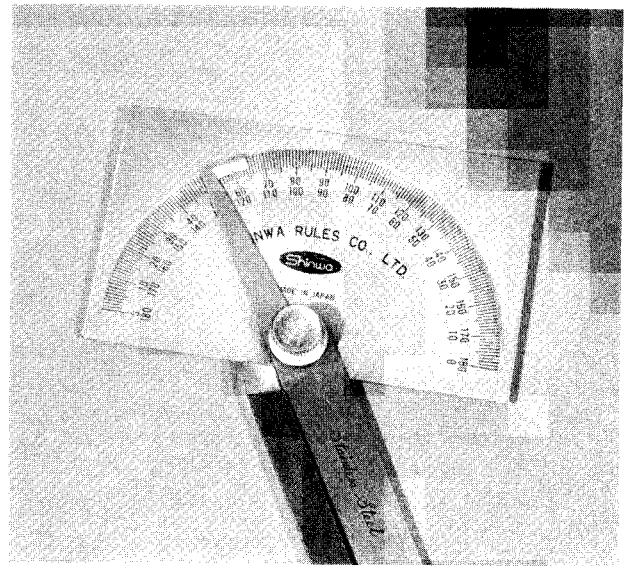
Measuring the end-cutting angle with a protractor.
